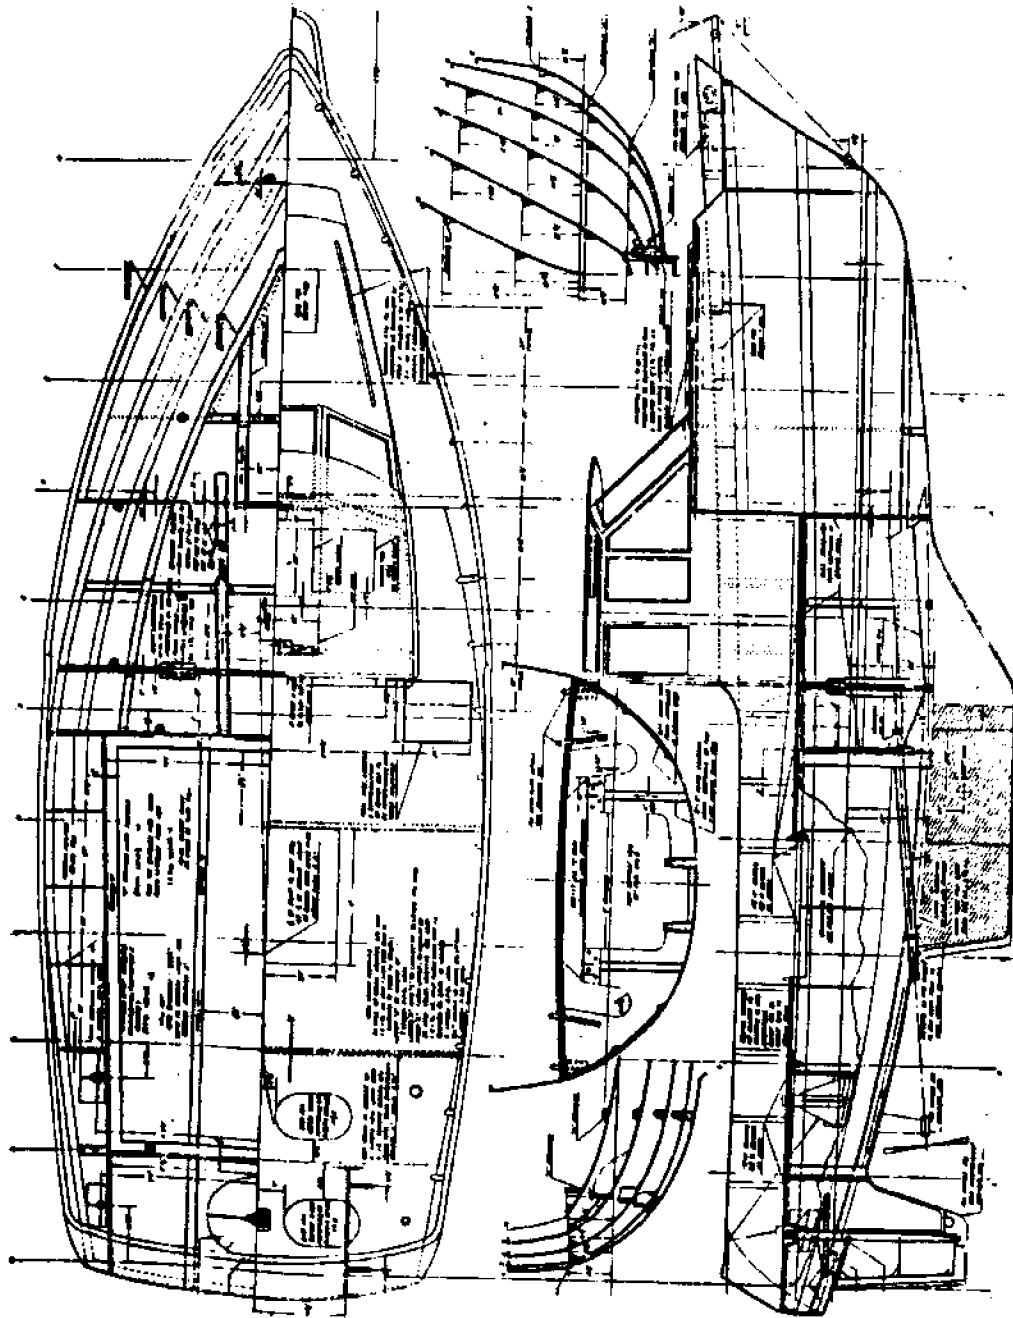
Deck layout and accommodations plan for the Aquaria sail assist.
